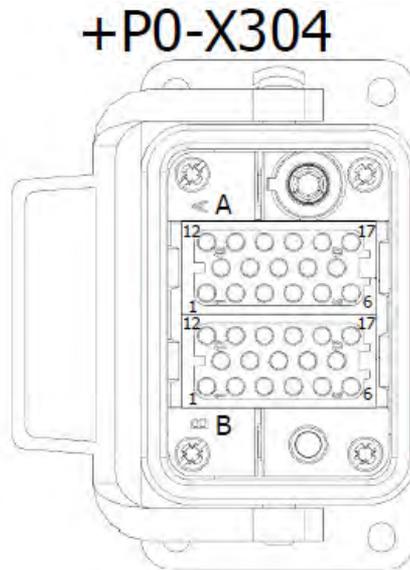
Injection Molding Machine Interface - X304 Connector
